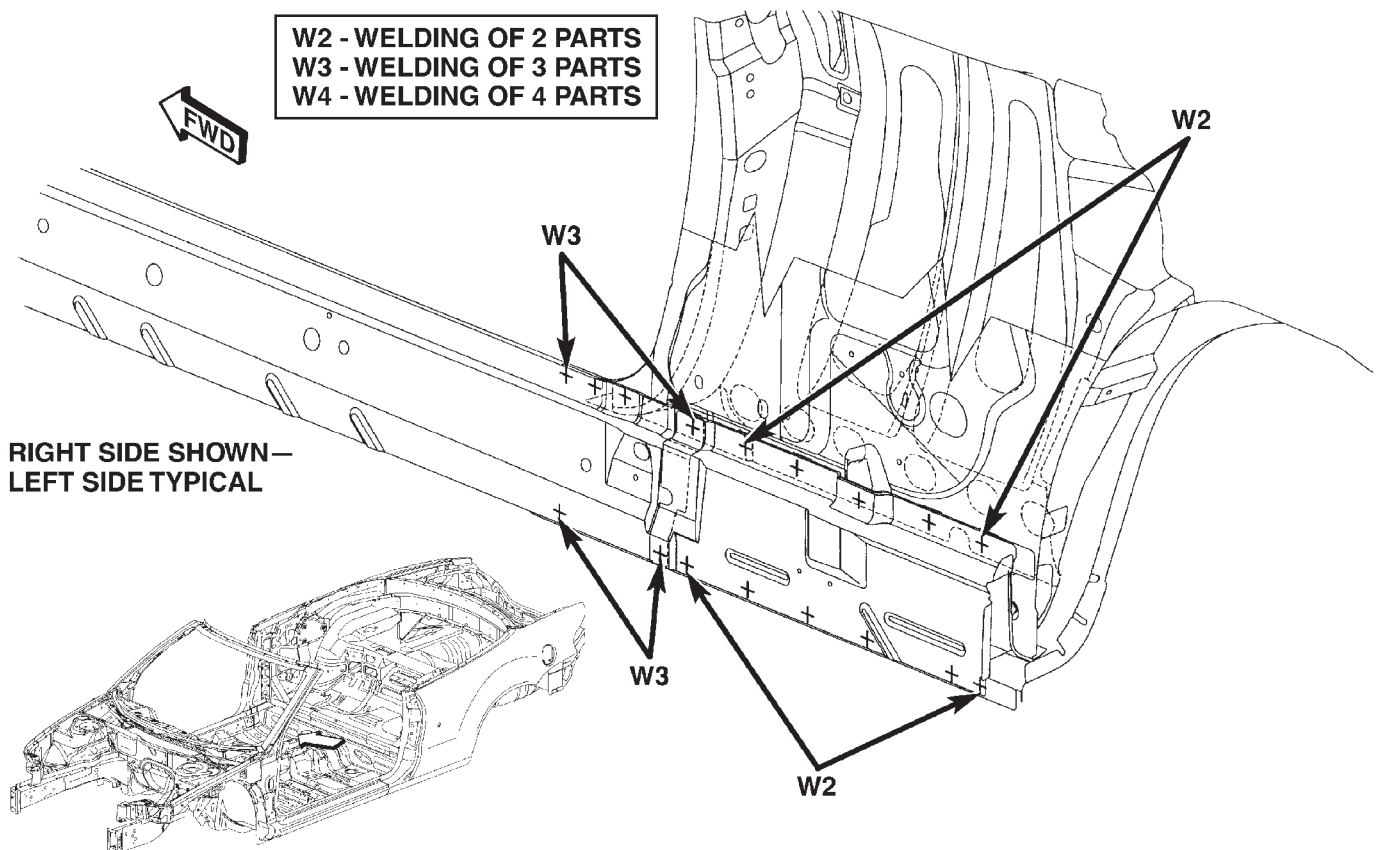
INNER BODY SIDE SILL TO OUTER BODY SIDE PANEL TO INNER SIDE SILL EXTENSION
